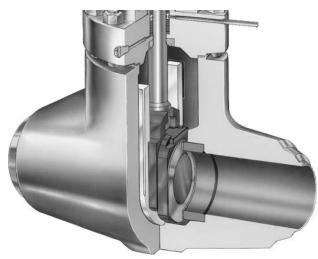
Parallel-gate valve. (*Courtesy of Velan Valve Corporation*)
